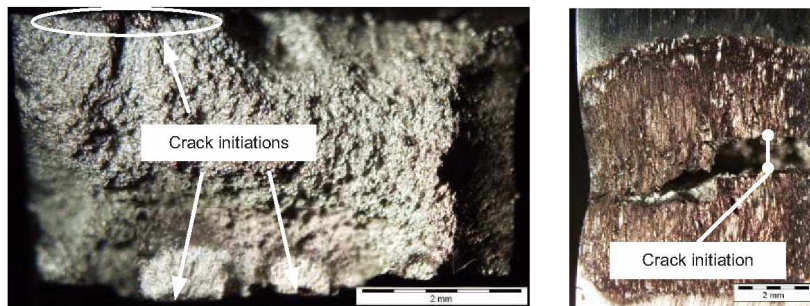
Fracture and fretting damaged surface of a solution treated polymer-quenched specimen at 350 MPa
